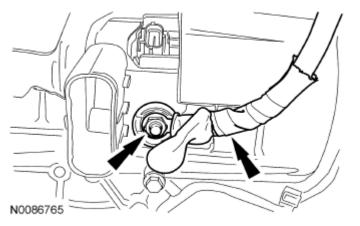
Locating Nut And Generator B+ Wiring Harness Courtesy of FORD MOTOR CO.
